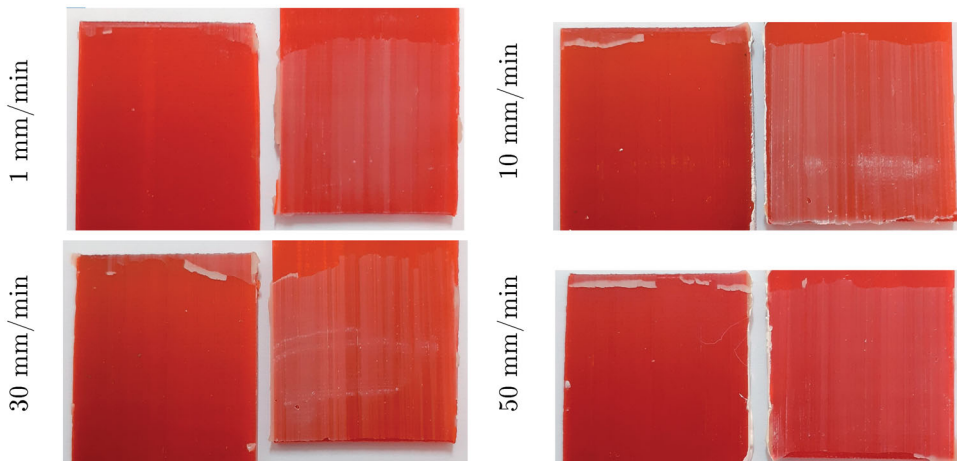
Fracture surfaces of 3D-printed PLA adhesive single-lap joints after four-point bending tests at different loading rates.
